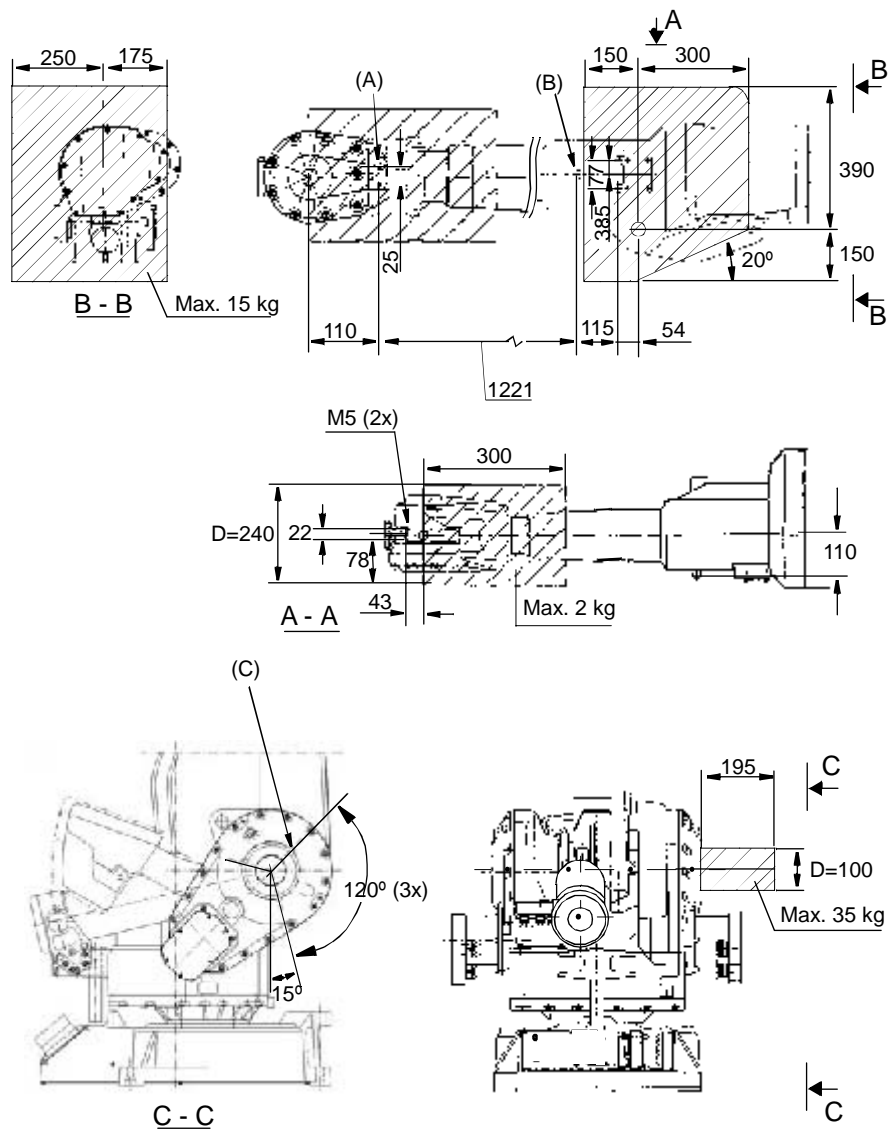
The shaded area indicates the permitted positions (center of gravity) for any extra equipment mounted in the holes (dimensions in mm).
